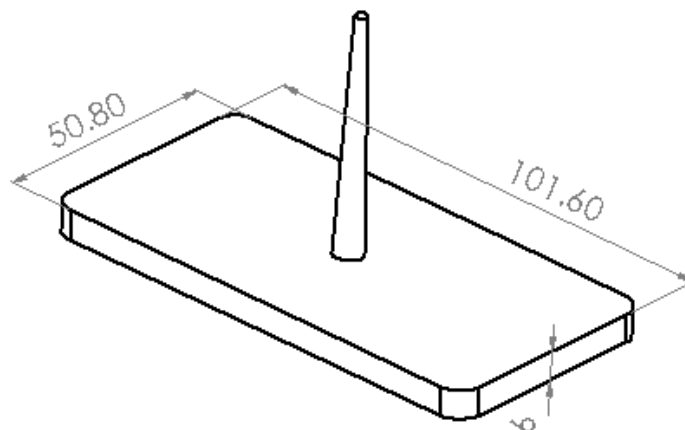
Schematic of an injection molded component. The original cavity thickness without mold cavity expansion is 6 mm. (Unit: mm)
